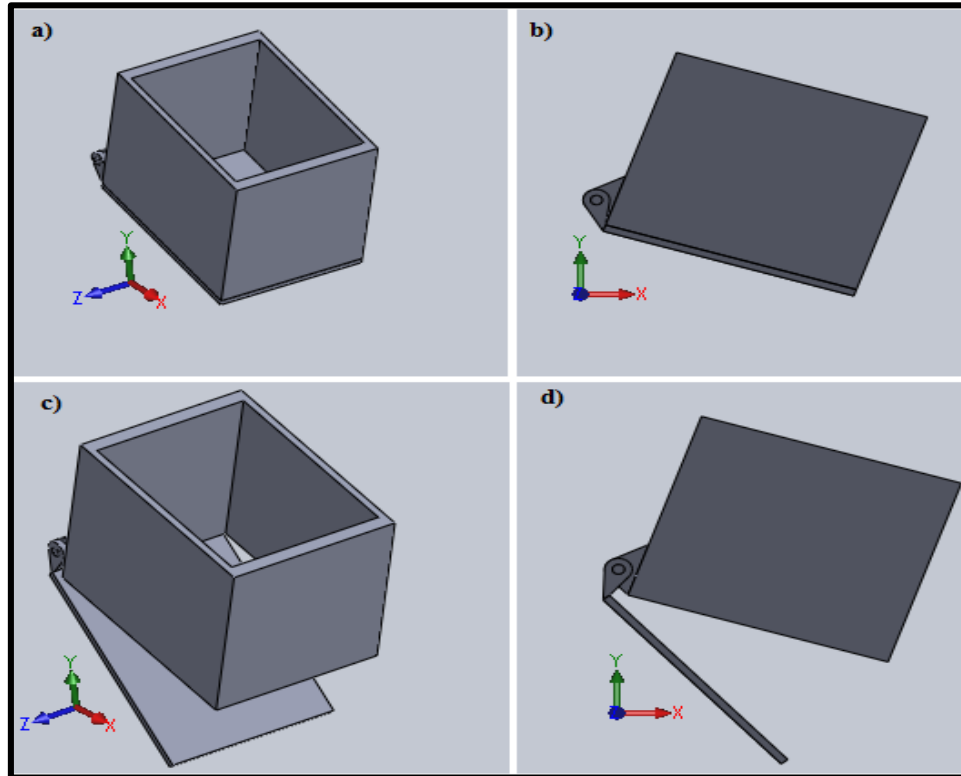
P&H 4100XPC Shovel Dipper Model: a) Isometric, b) Side, c) Isometric with Door Rotated, and d) Side Views with Door Rotated
